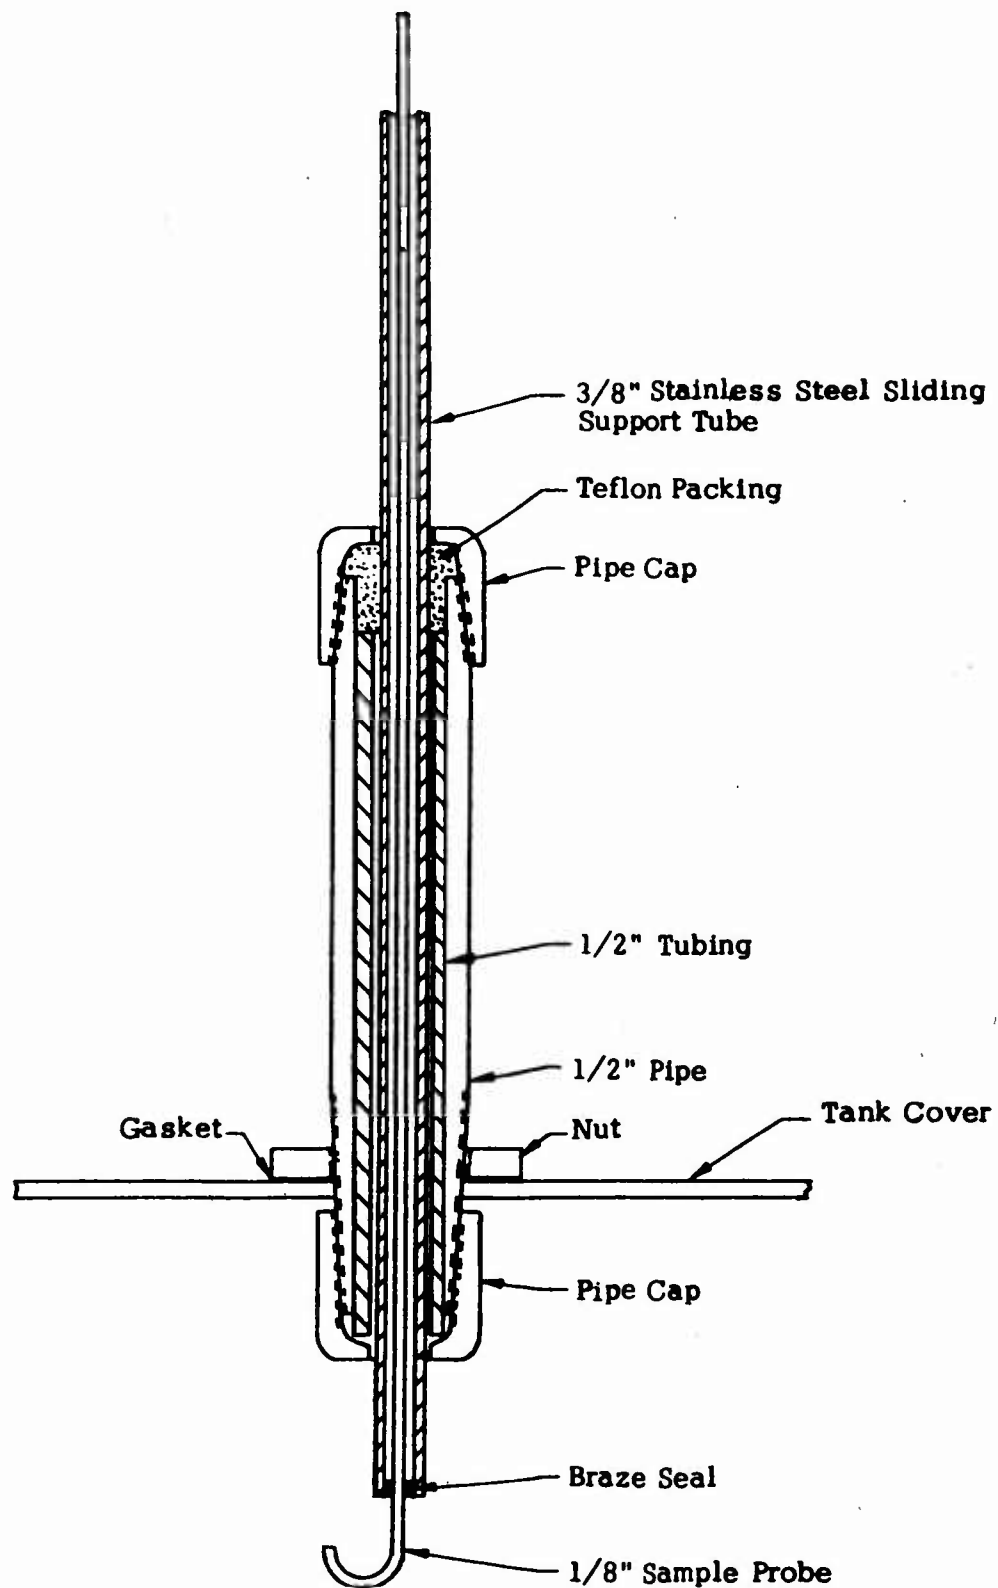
Sliding Vacuum Joint for Sampling Probe.
